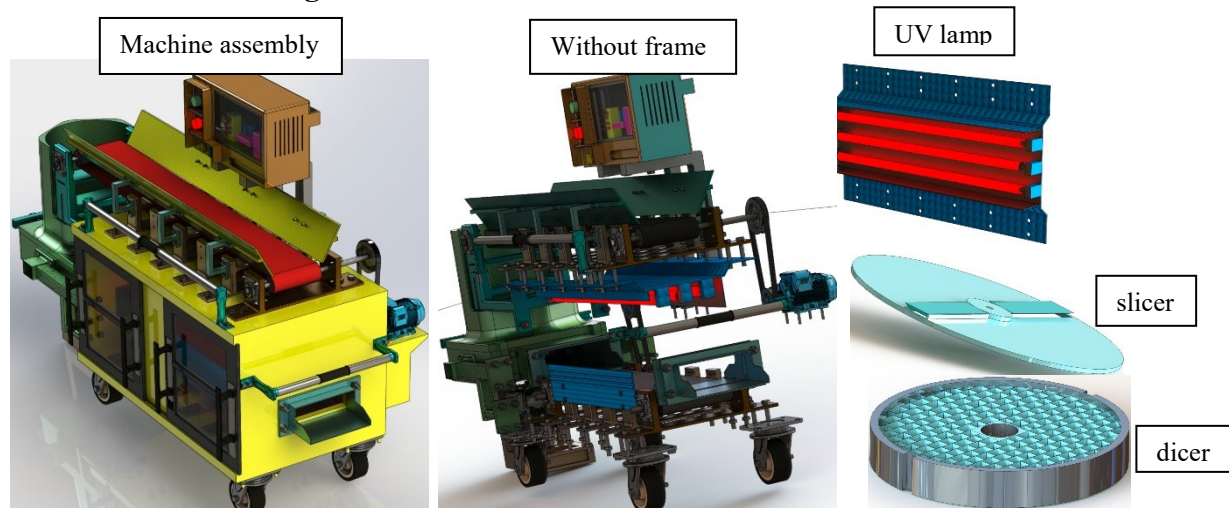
a) the whole machine assembly b) machine assembly without the frame c) UV light arrangement, disc and dicer.
